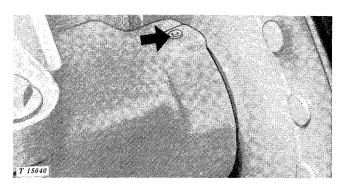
Axle Bearing Plug (Front Shown) (4 Points)
